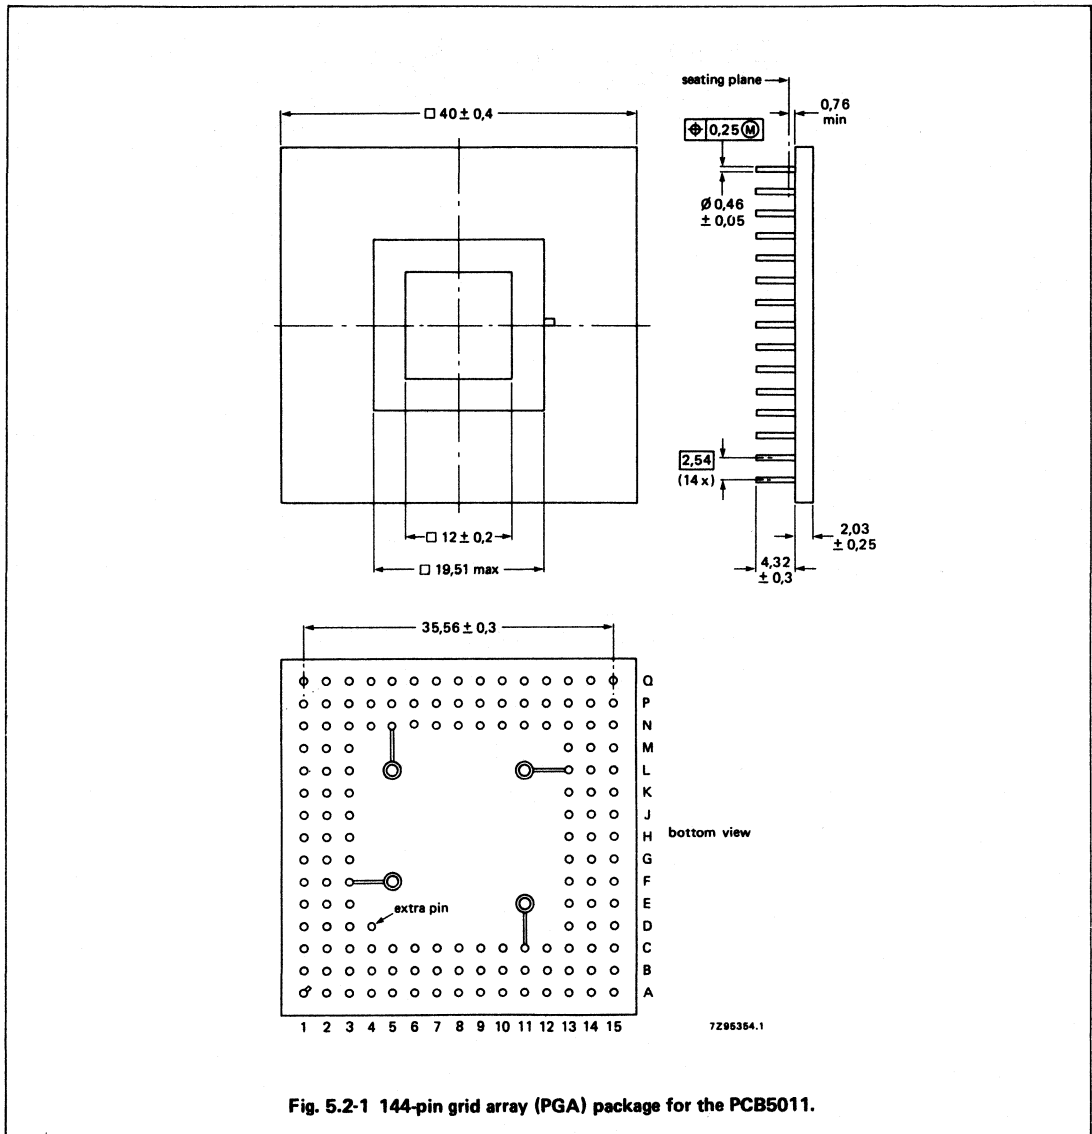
144-pin grid array (PGA) package for the PCB5011.
